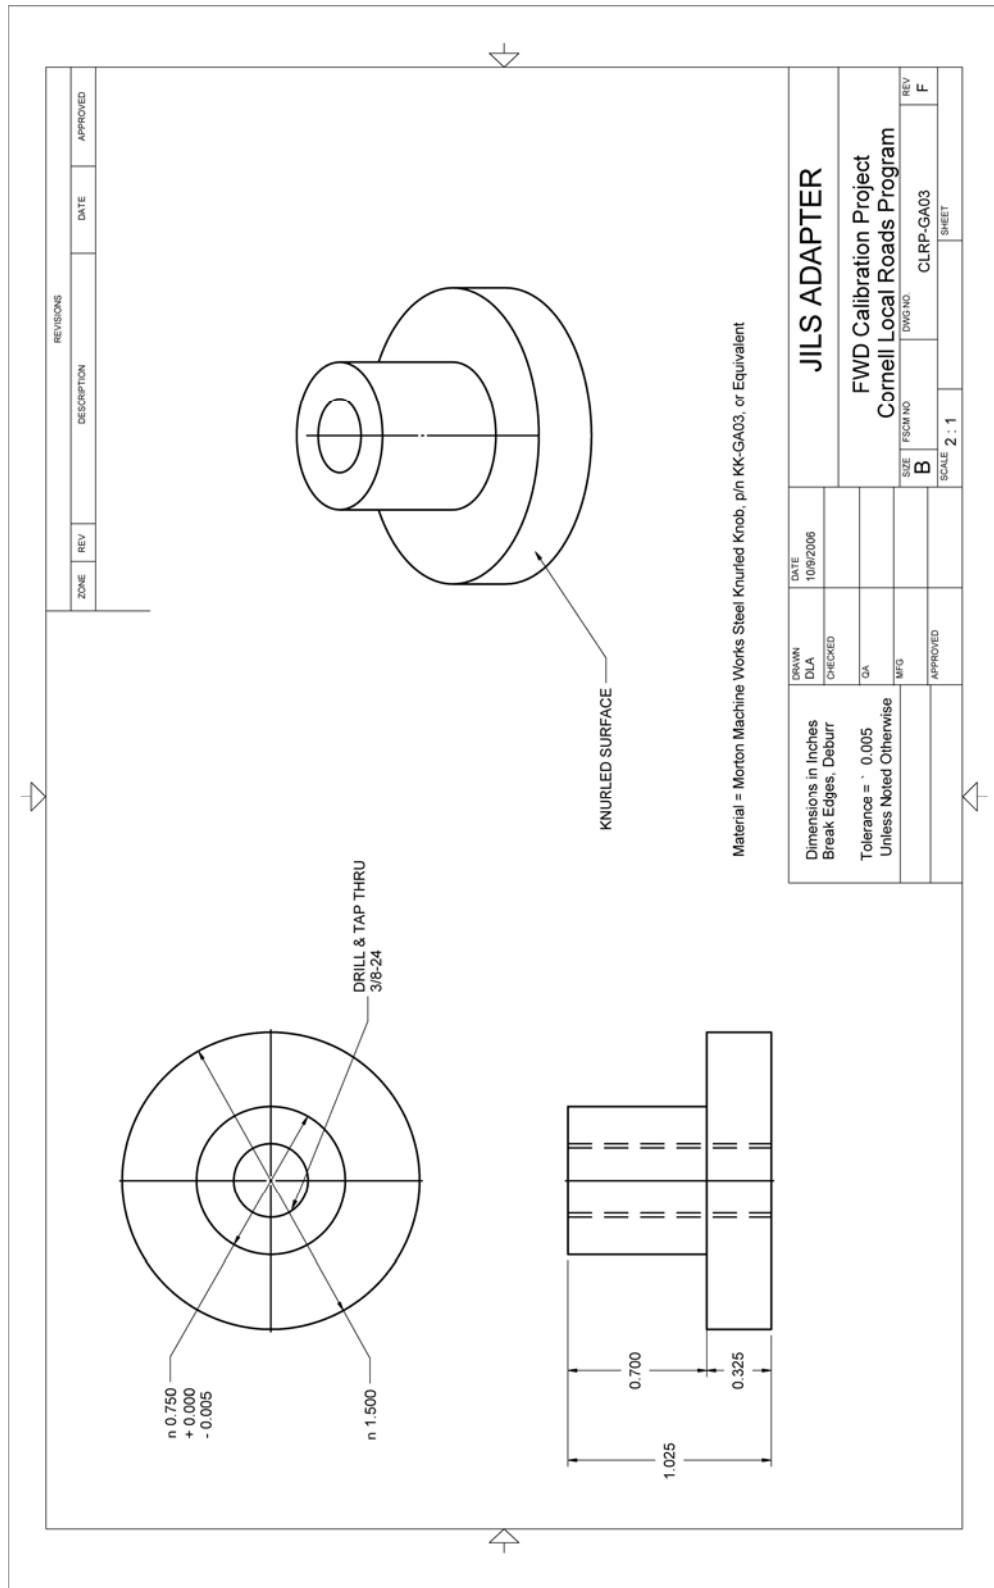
Drawing. CLRP-GA03 JILS Adapter.
